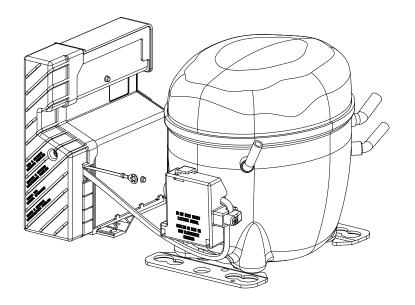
Perspective view of Inverter and Compressor assembled system.
